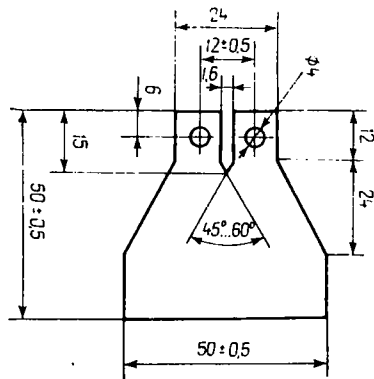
Form and dimensions of specimens for examining cracking resistance of CRGP.
